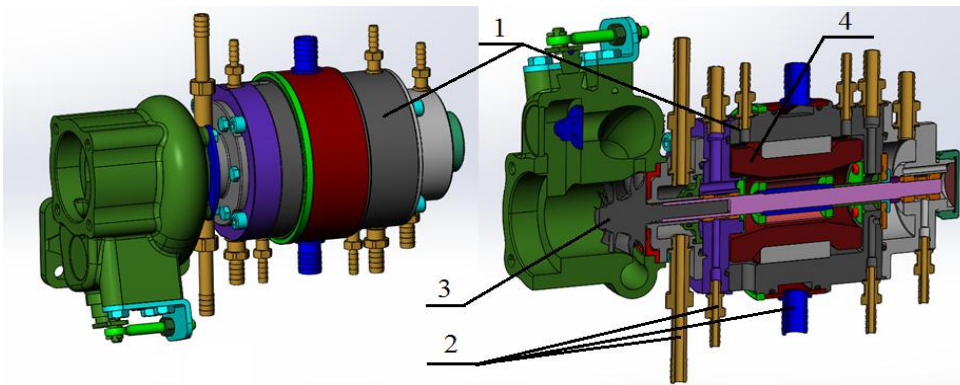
3D model of turbogenerator: 1 – housing with cooling jacket and covers; 2 – inlet and outlet connectors of coolant and lubricant; 3 – turbine; 4 – rotor and stator of electric machine.
